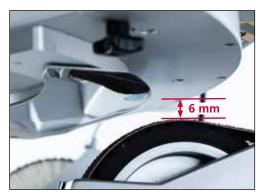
Distance of copy grinding plate to wet-grinding belt
